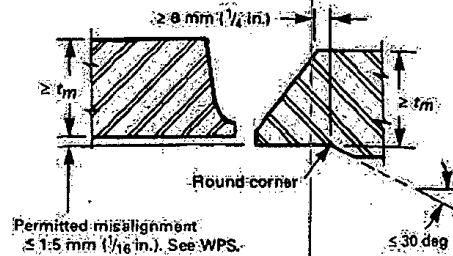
PIPE BORED FOR ALIGNMENT, TRIMMING AND PERMITTED MISALIGNMENT
